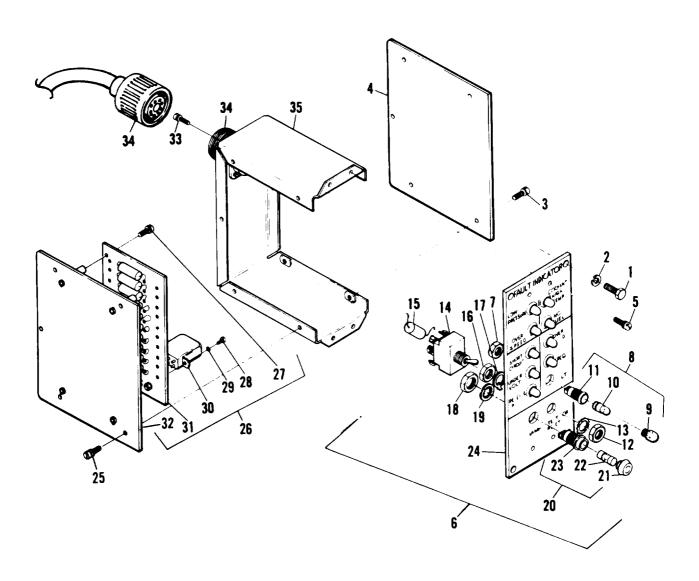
Fault Locating Indicator, Exploded View (Sheet 1 of 2)
